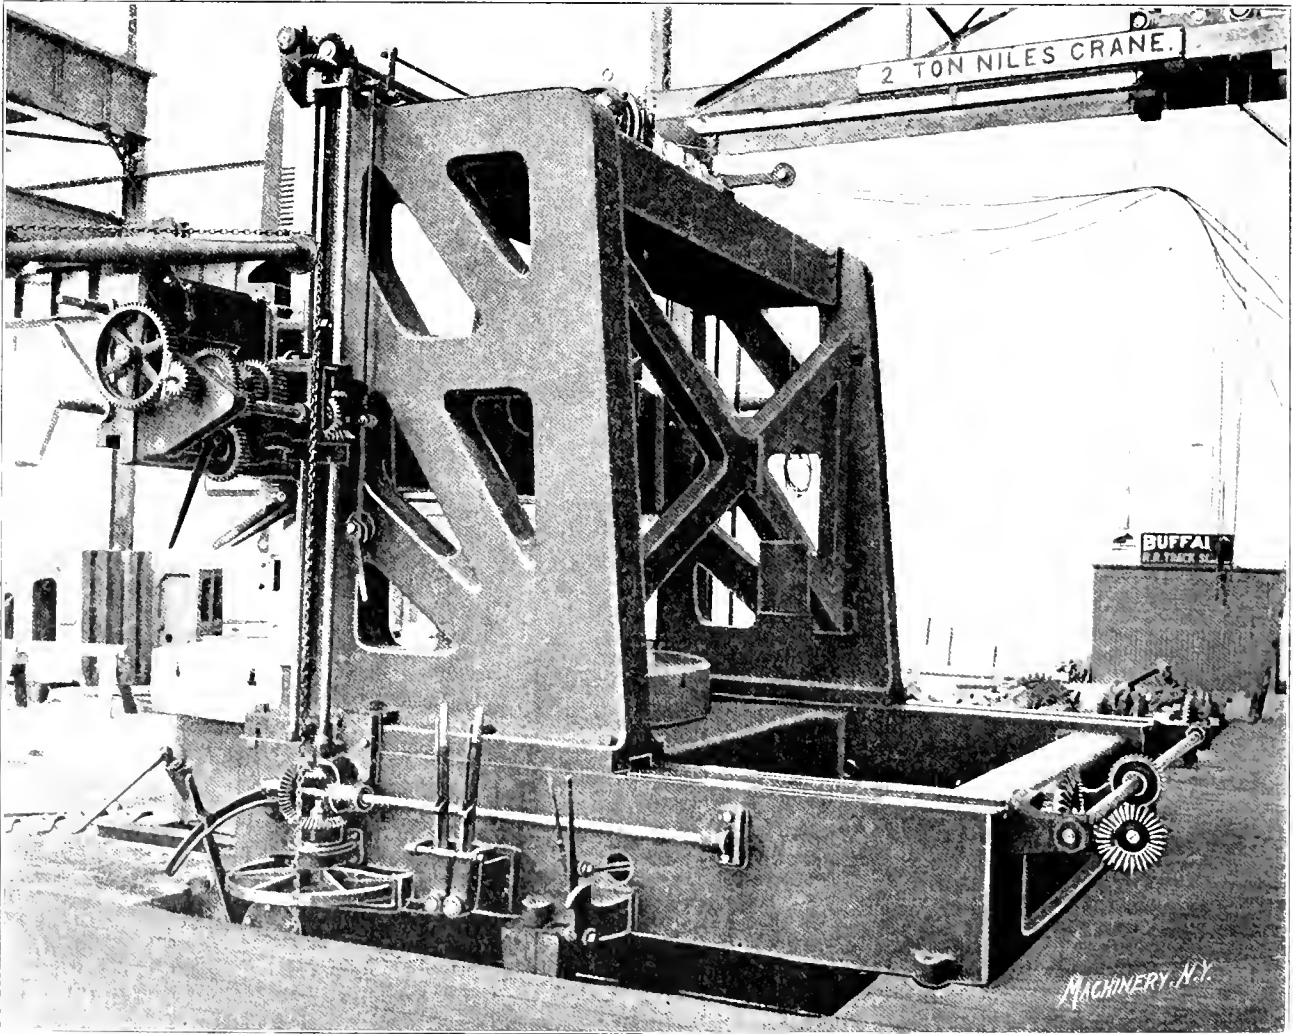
Rear View of ten-sixteen Extension Boring Mill, showing Rigid Construction of Uprights.
